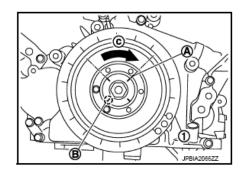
Rotating Crankshaft 270 Degrees Courtesy of NISSAN MOTOR CO., U.S.A.
